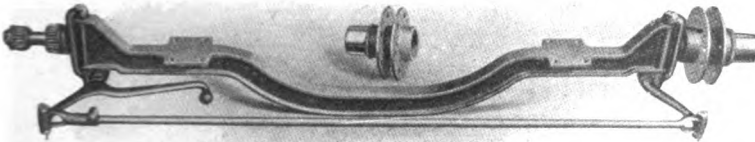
Complete Front Axle Showing Steering Heads and Tie-Bar.
